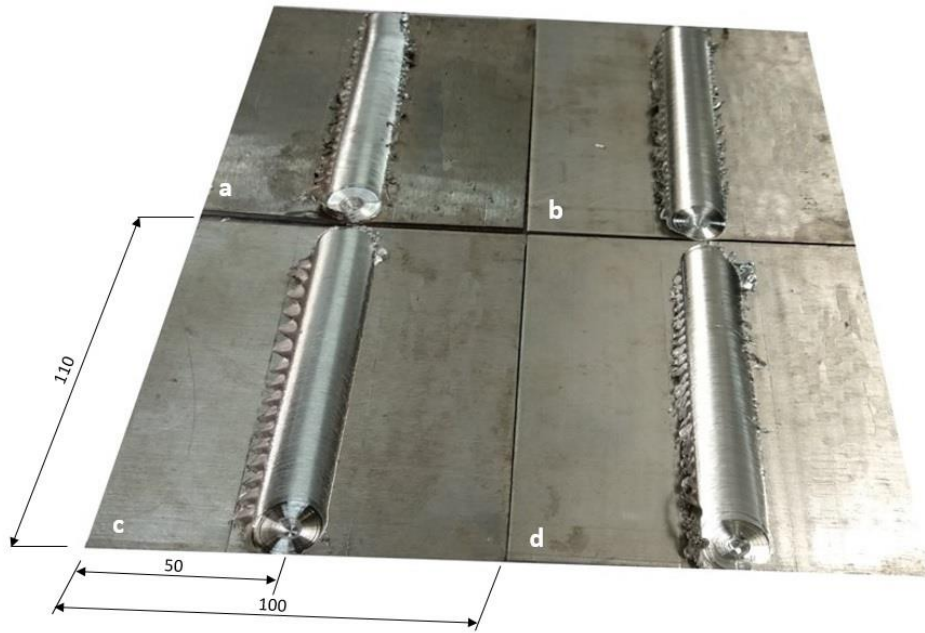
Photograph of FSW joints achieved at different tool tilt angles: (c) 0°, (d) 1°, (b) 2° and (a) 3°.
